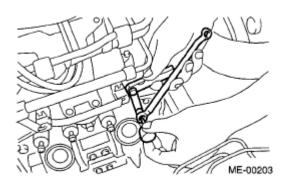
Adjusting Exhaust Valve Clearances Courtesy of SUBARU OF AMERICA, INC.
